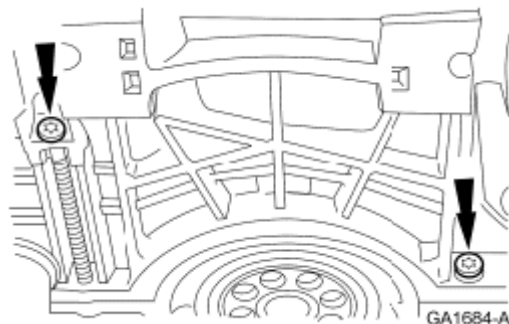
Locating Cylinder Block Cradle Torx Bolts
